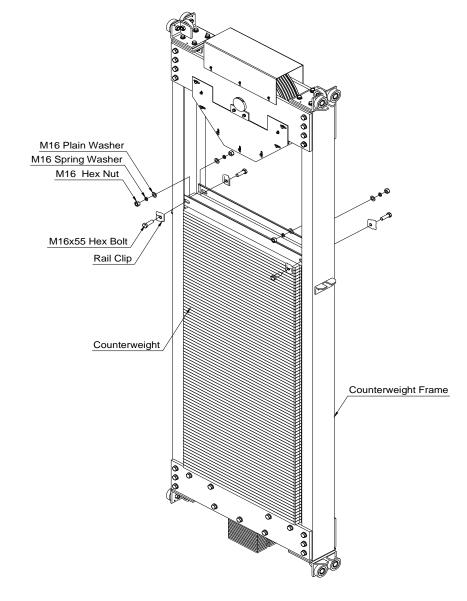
CLIP TYPE WEIGHT FIXING
